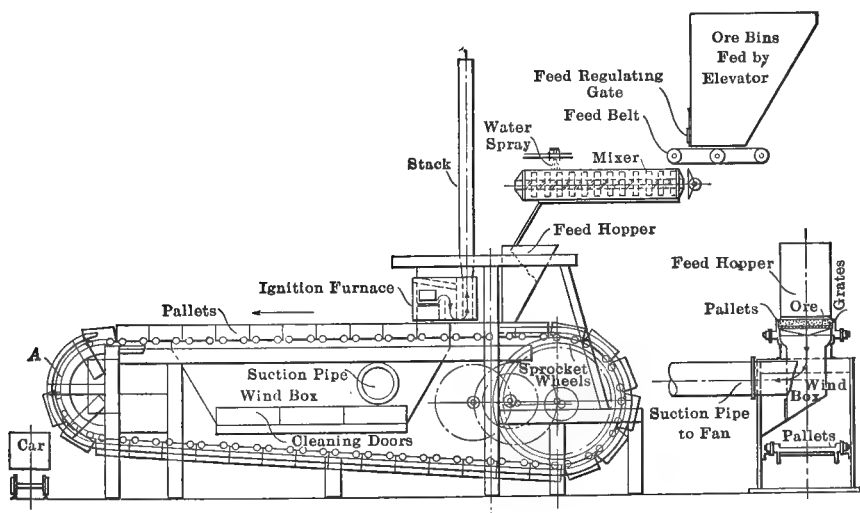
Dwight-Lloyd straight-line roasting machine.
